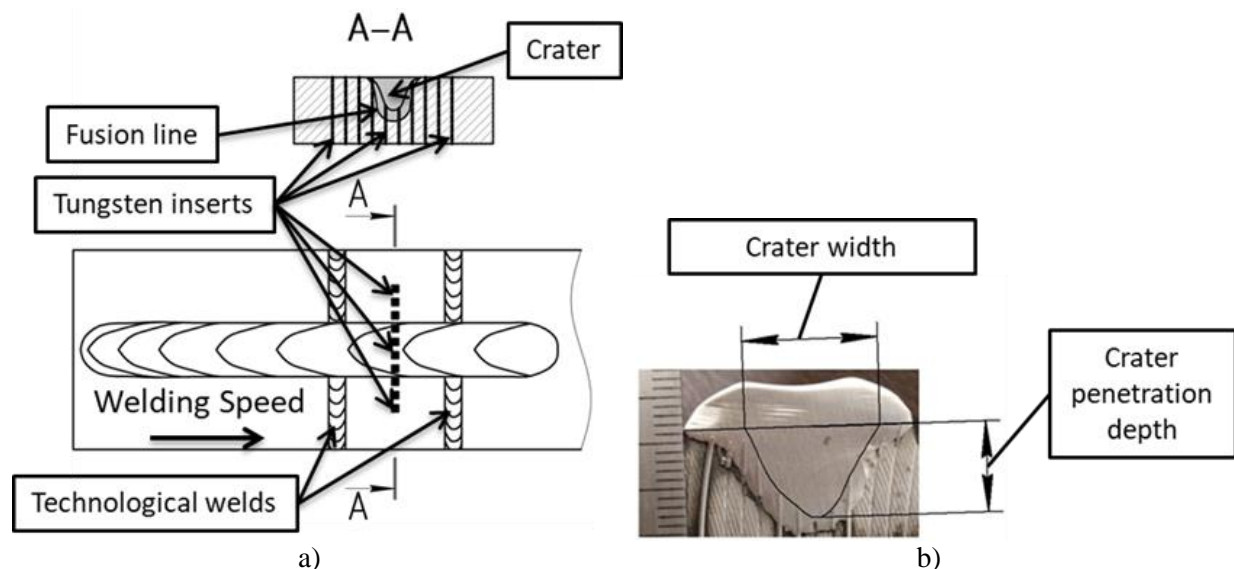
Determination of geometrical crater parameters: a) Scheme of plate with tungsten inserts; b) Crater geometrical parameters.
